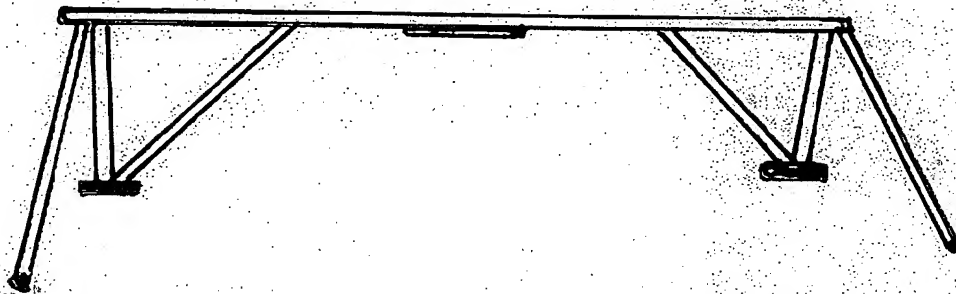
ROLLER PLATE ASSEMBLY PART # 863
